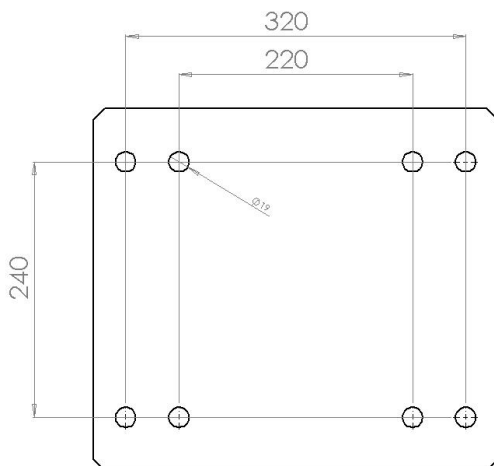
Forest Crane COUNTRY 480 mounting plate measures (mm)
